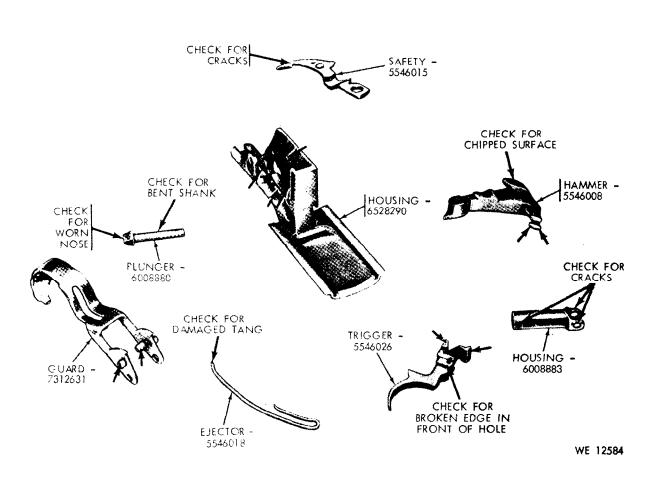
Inspection points of component parts of trigger housing assembly.
